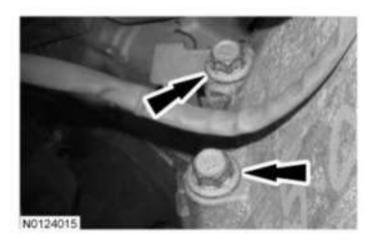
Locating Transmission-To-Engine Bolt And Transmission Cooler Tube Support Bracket
